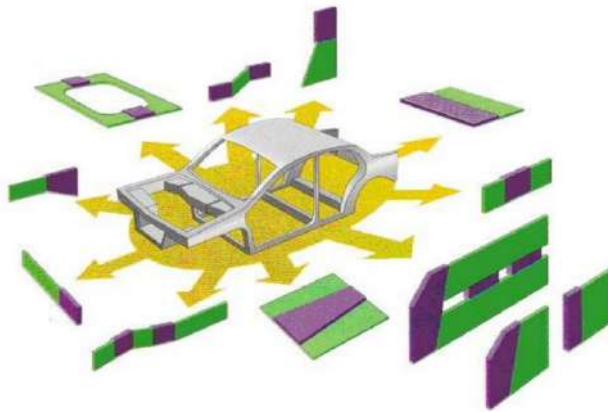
Tailored welded blanks in a passenger vehicle [36].
